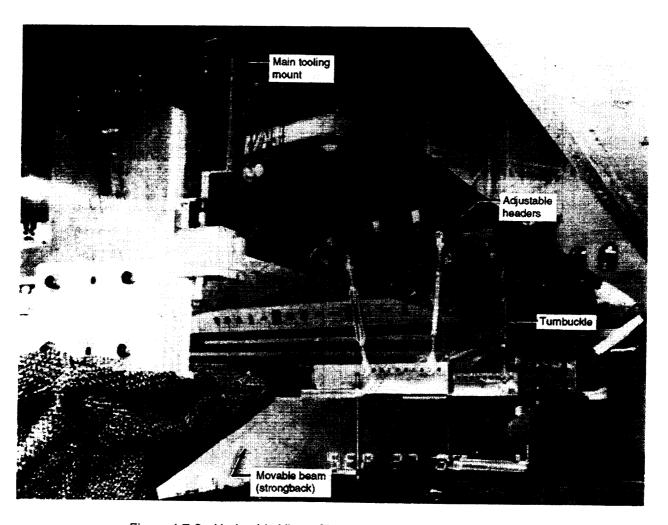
Underside View of Leading Edge and Installation Fixture
